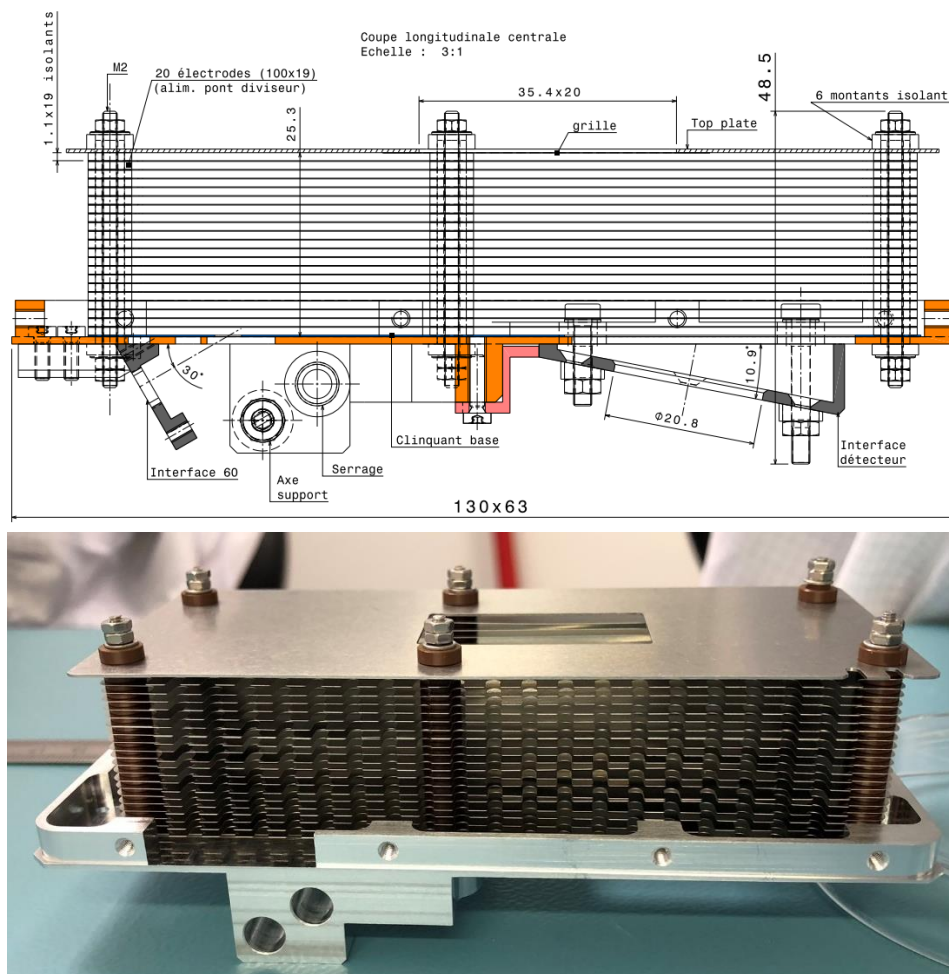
Top panel is a mechanical drawing of the energy analyser assembly. Bottom panel is the corresponding photograph of the EA prototype.
